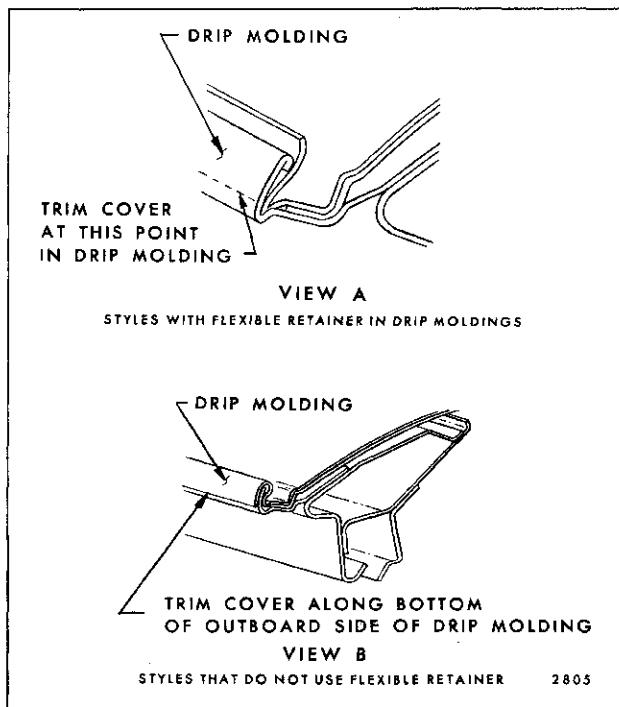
Typical Fabric Roof Cover Installation with Pad and Roof Panel Moldings
